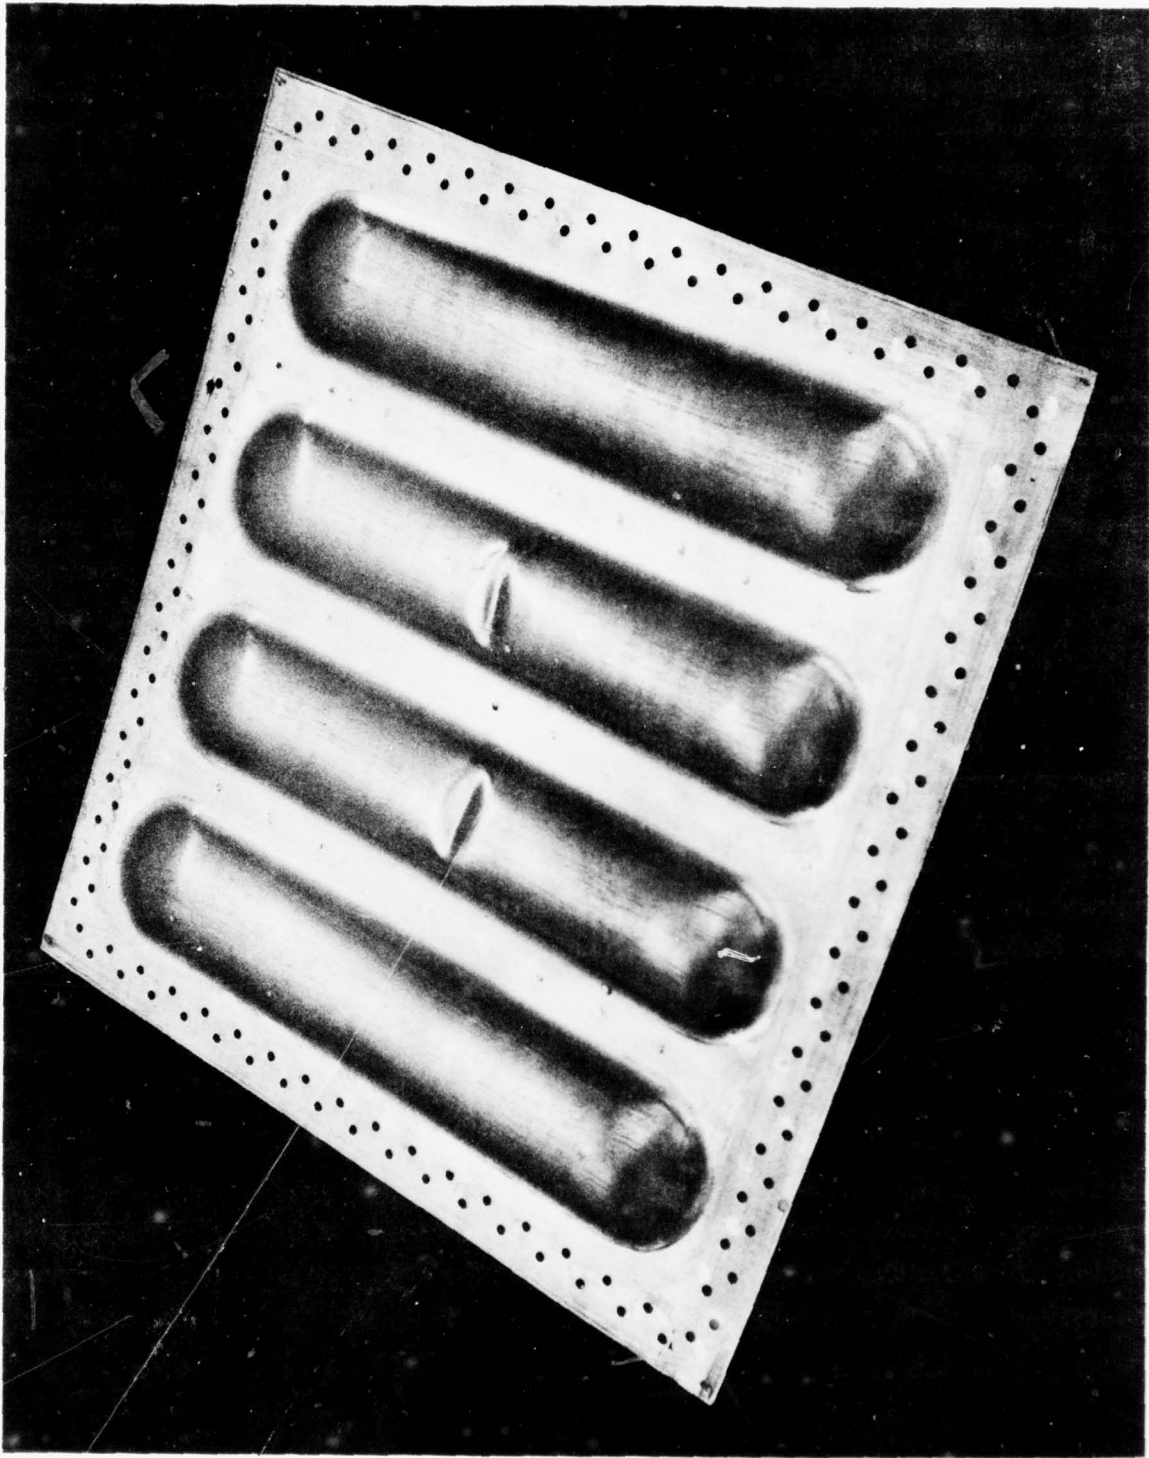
TYPICAL PRESSURE PANEL STATIC TEST FAILURE
